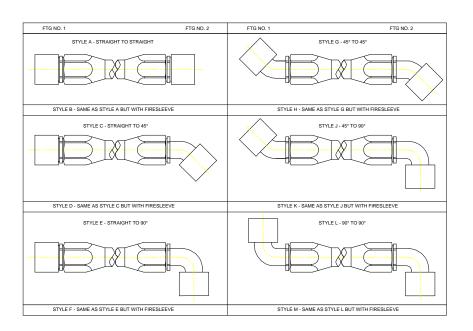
Hose assembly styles, field attachable fittings, flange to flange.
